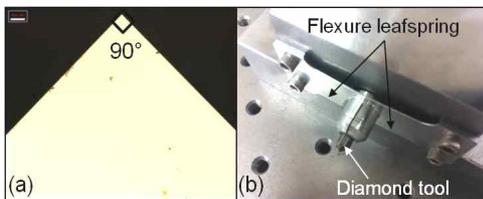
Diamond tool (a) with 90° nose angle and (b) assembly on the tool holder
